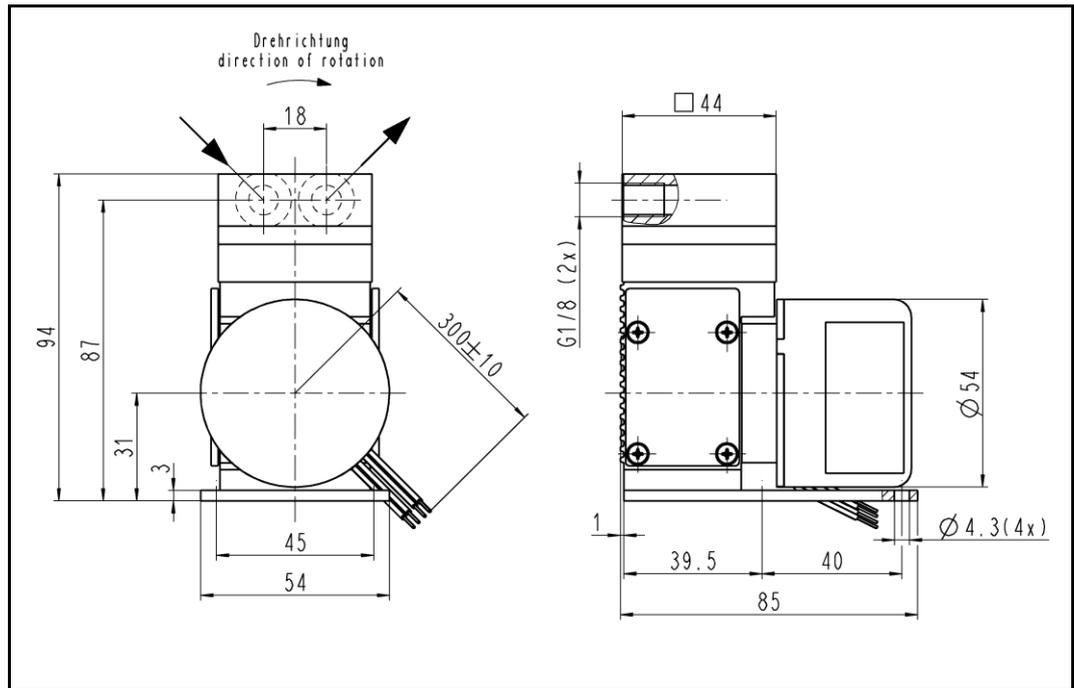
Mounting dimensions pump series N 86 A_12.29 DC-B
